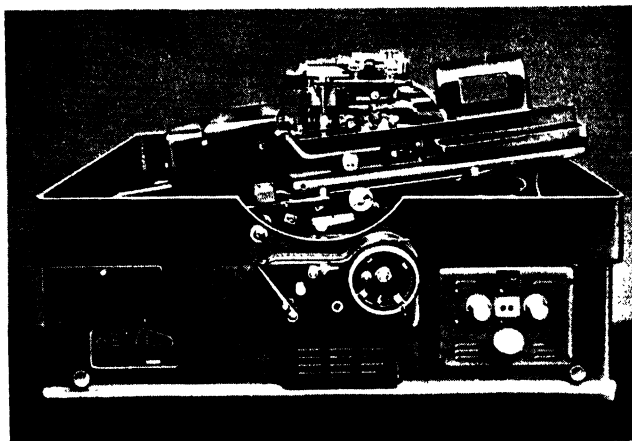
THE NEWALL MODEL 836 THREAD-GRINDING MACHINE
